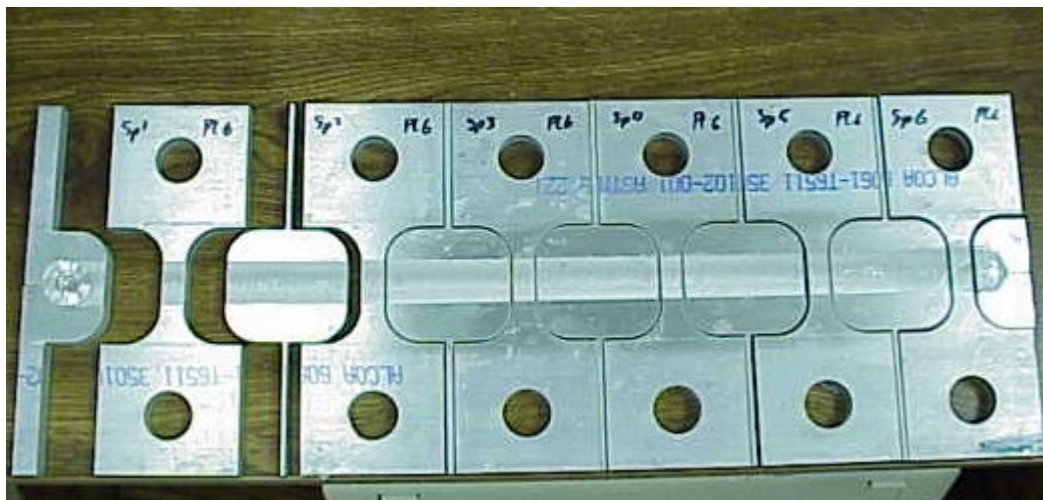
Fatigue Specimens as cut from Friction Stir Welded AA_6061-T651 Aluminum Plates
